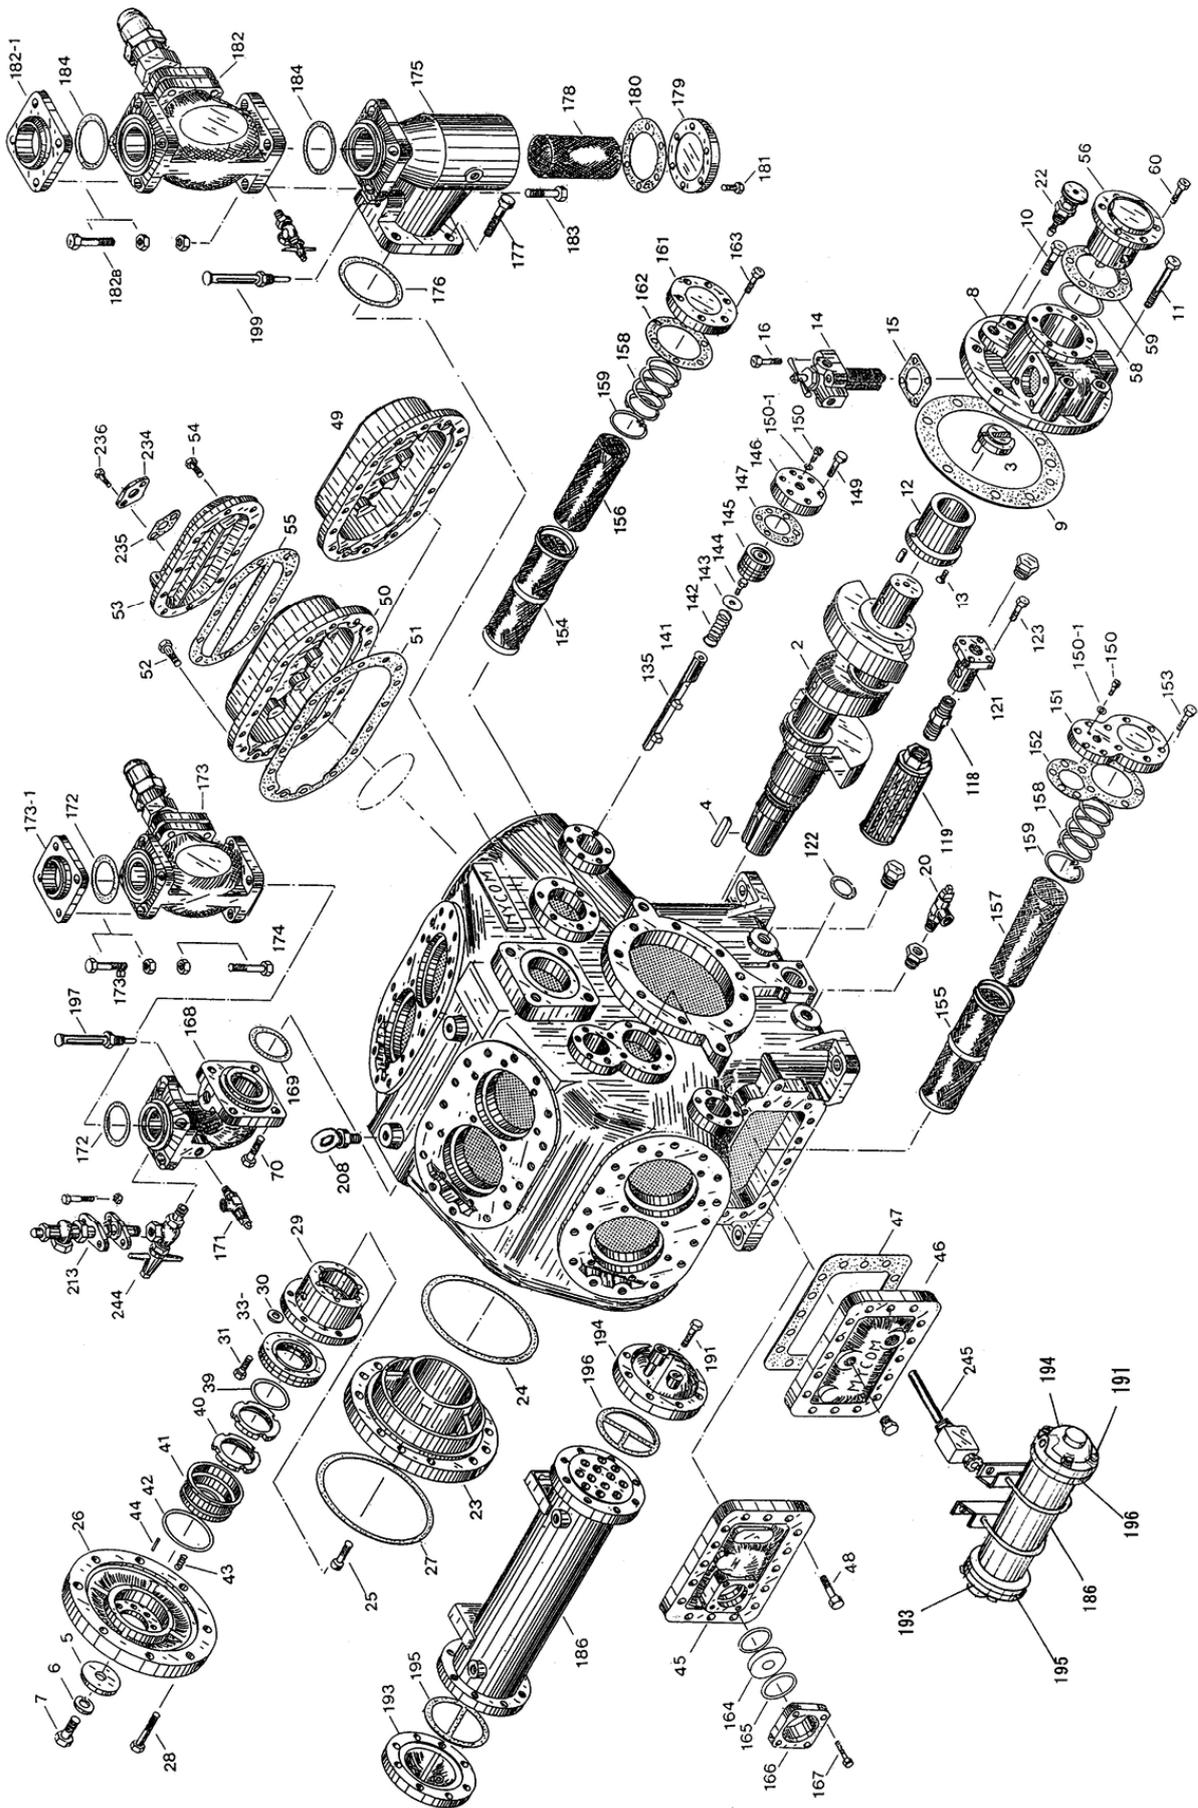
Development View of the Entire WA-type (8WA) Compressor
